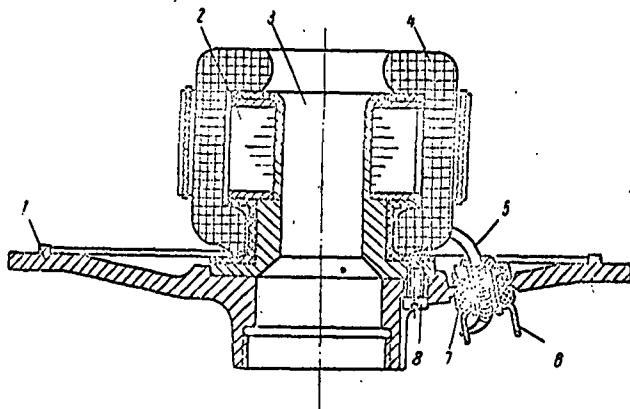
Fixing stator to cover. 1) Cover; 2) stator core packet; 3) bush; 4) winding; 5) output ends of winding; 6) output lobe; 7) insulating bush; 8) screw.
